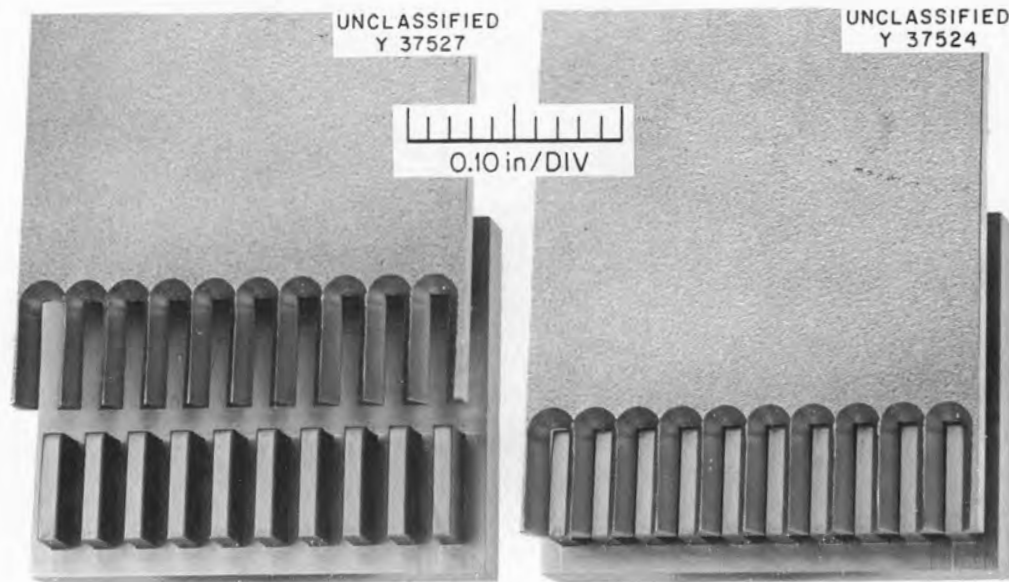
Second Welded-Assembly Joint Design.
